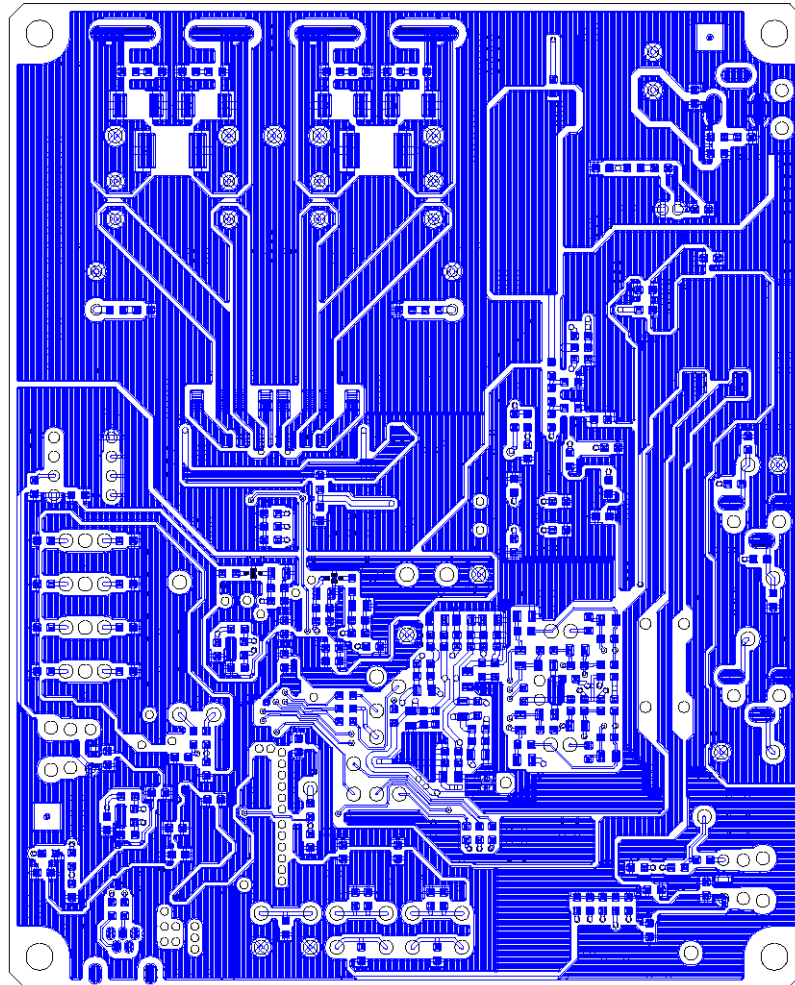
NJU26060 Demo Board (APC-005-1) backside pattern
